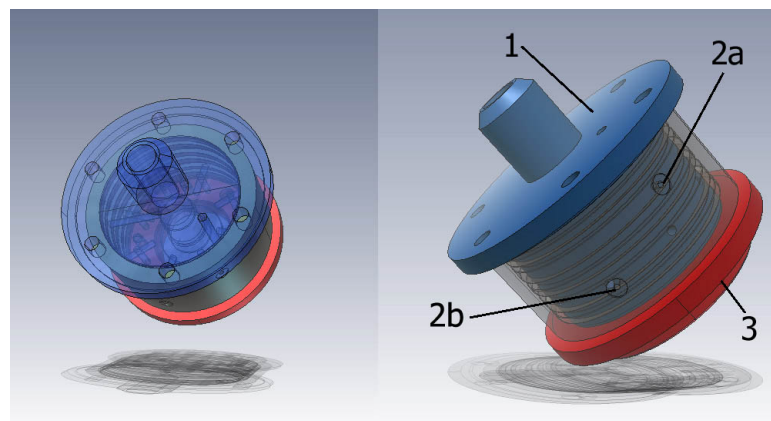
Views showing the body (1), air inlets (2a), and (2b) on the slip-ring and (3) the upper adapter plate.
